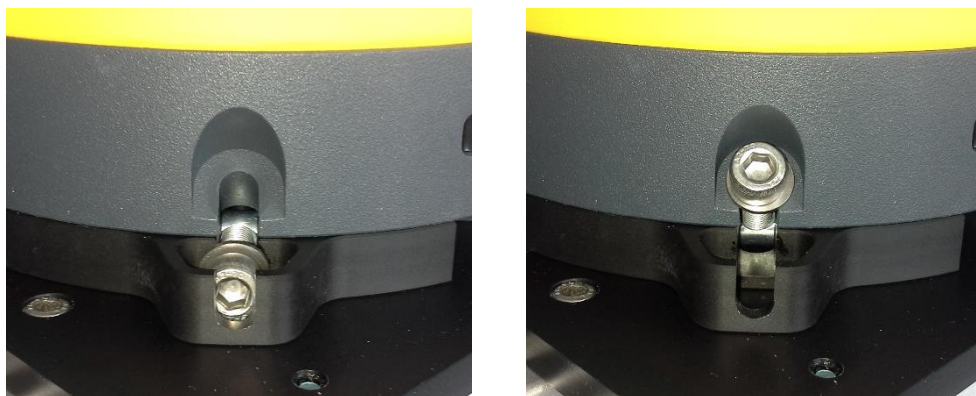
QRP # Mounting screws to fix the Sensor Head (loosen and tighten)
